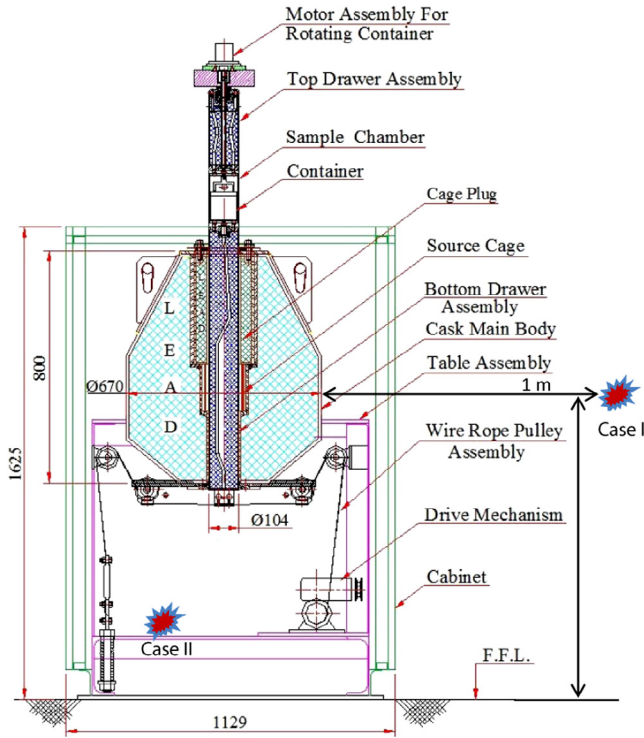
Sectional View of Typical Gamma Chamber with major dimensions in millimeter.
